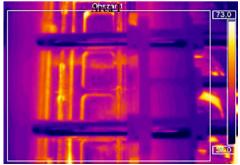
Temperature field of mold equipment in manufacturing machine No. 2 – view from mold parting side
